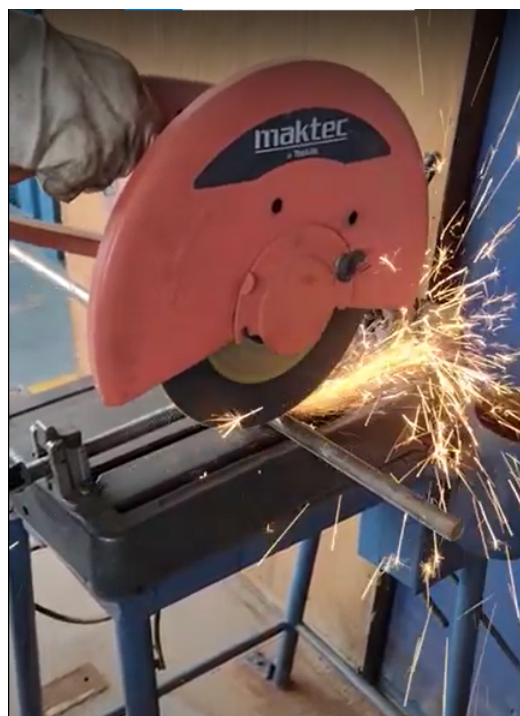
Bar being cut which will generate the smaller bars with 217 mm to support the chassis.
